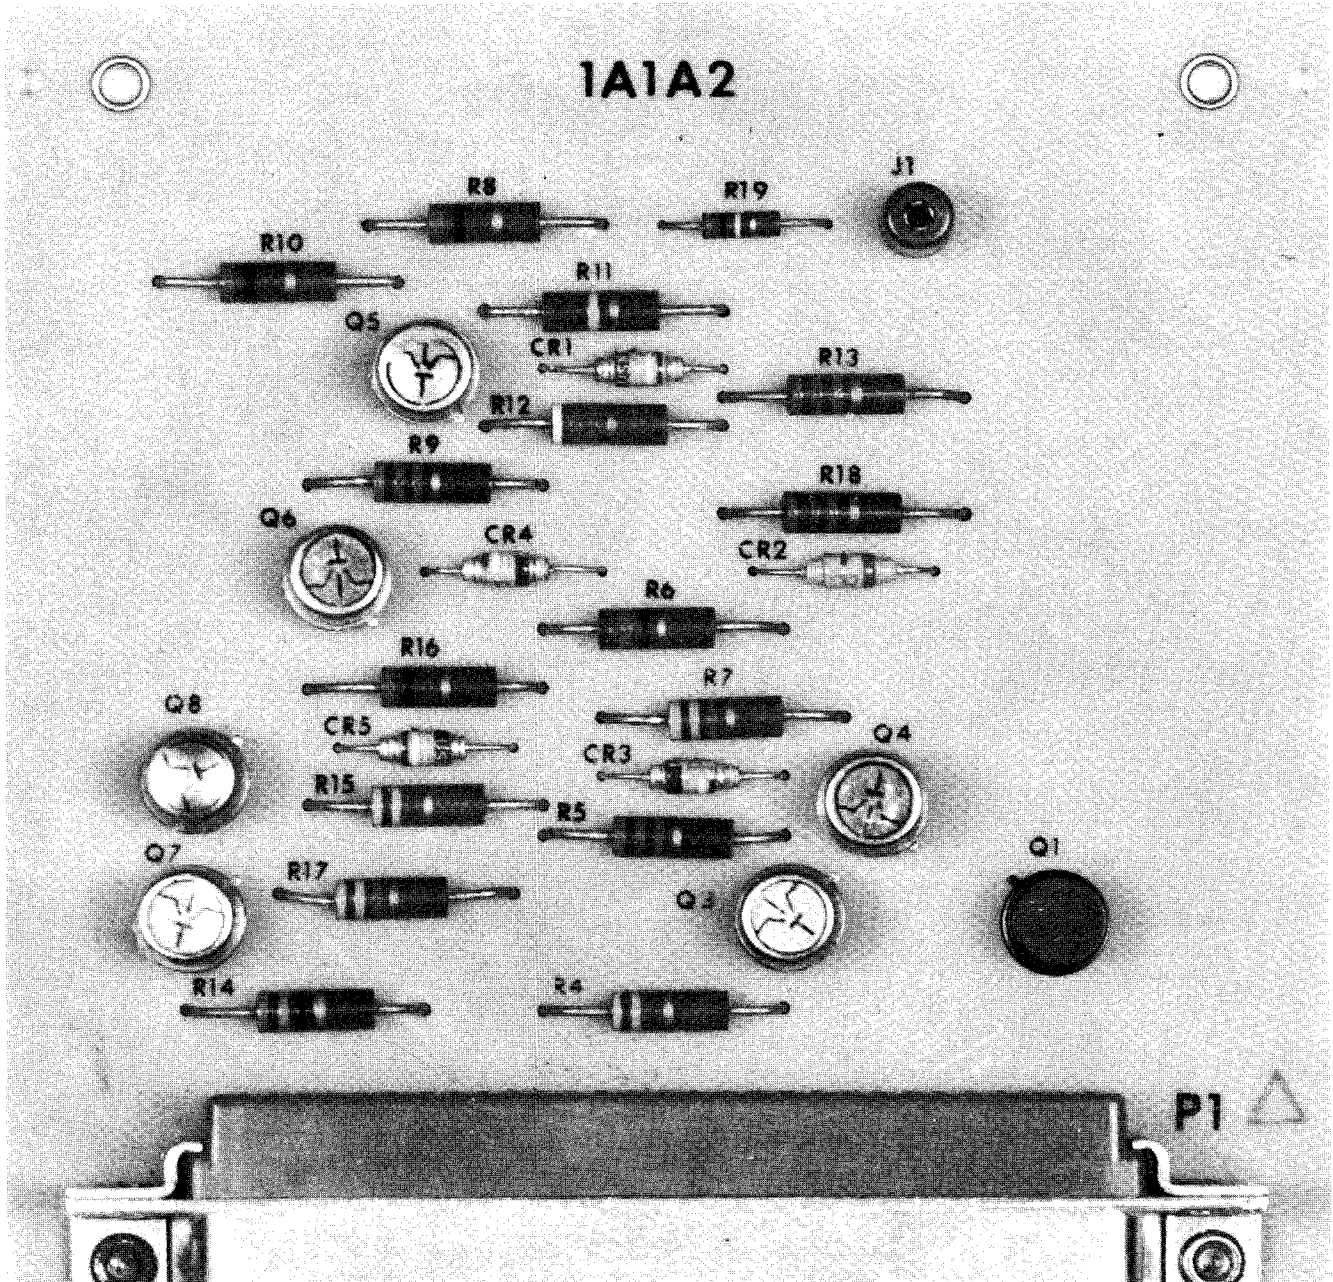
Oscillator-Power Supply, Printed Circuit Board 1A1A2
